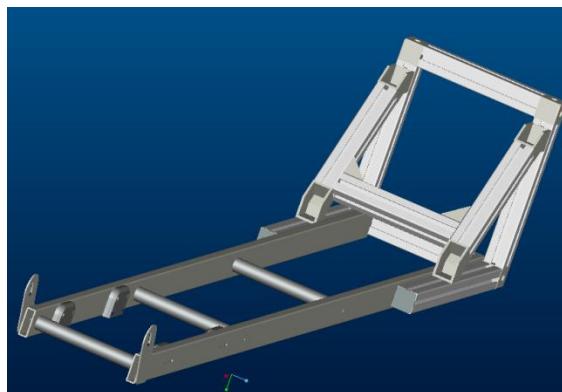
Particular of the brackets to fix frame B to frame A
